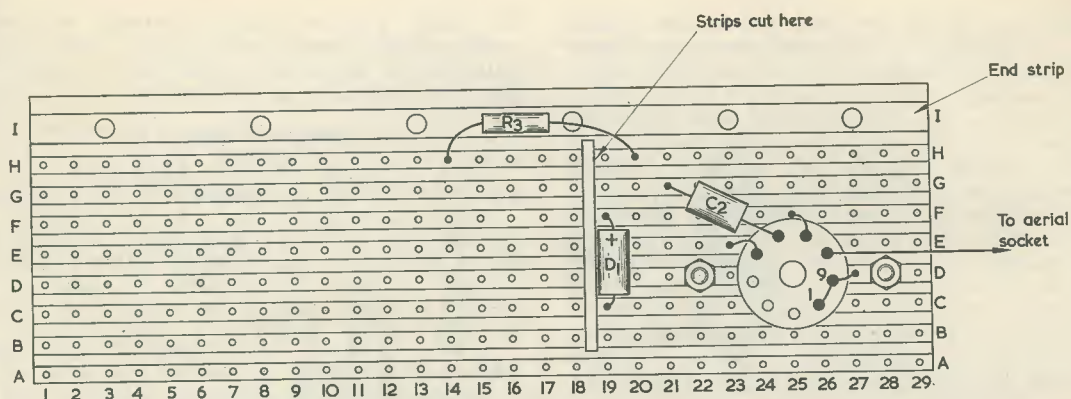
Wiring on the conductor side of the Veroboard. Note that a connection from D28 to D19-22 is carried over by the metal frame and mounting nuts of the coil holder. The nuts should not short-circuit against strips C or E
